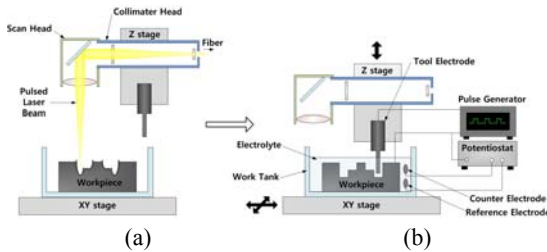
System for hybrid micro machining using LBM and ECM (a) Pre-machining by LBM (b) Post-machining by ECM
